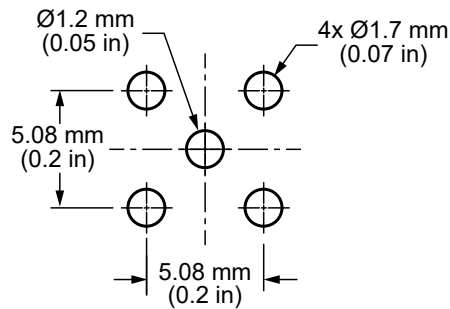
Recommended PCB Dimensions for the CON SMB002-G
